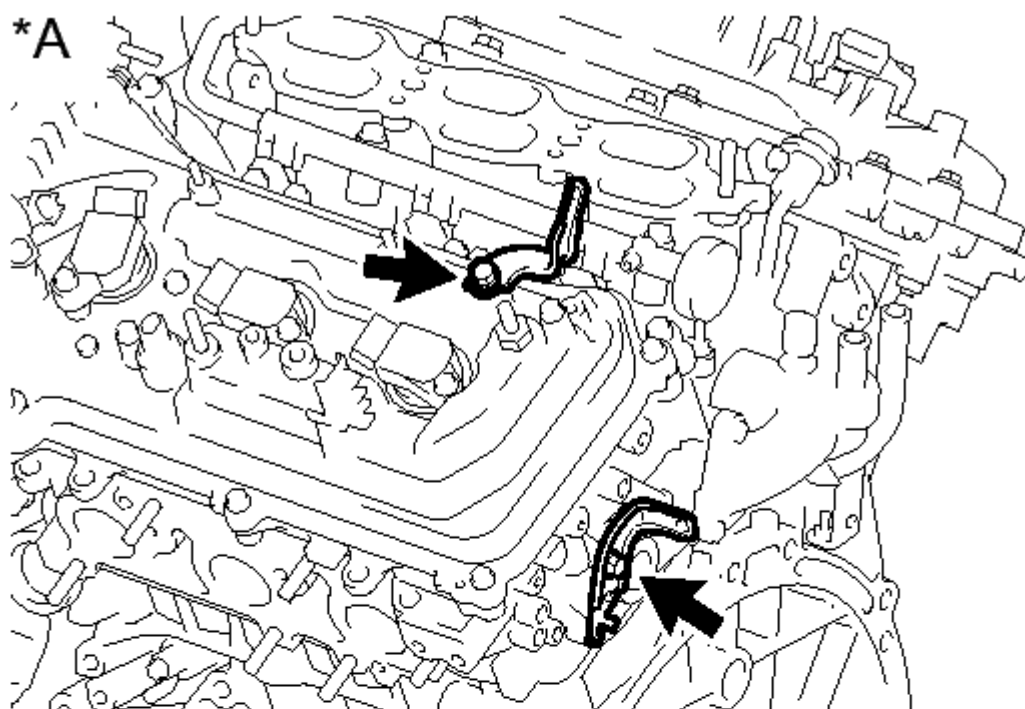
Identifying Harness Clamp Brackets & Fasteners
